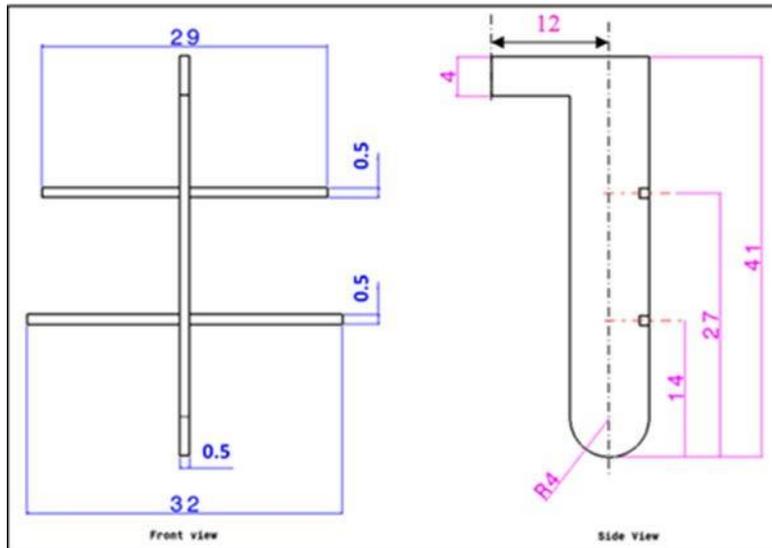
Roll Cage Template Drawing (All Dimensions are in inches)
